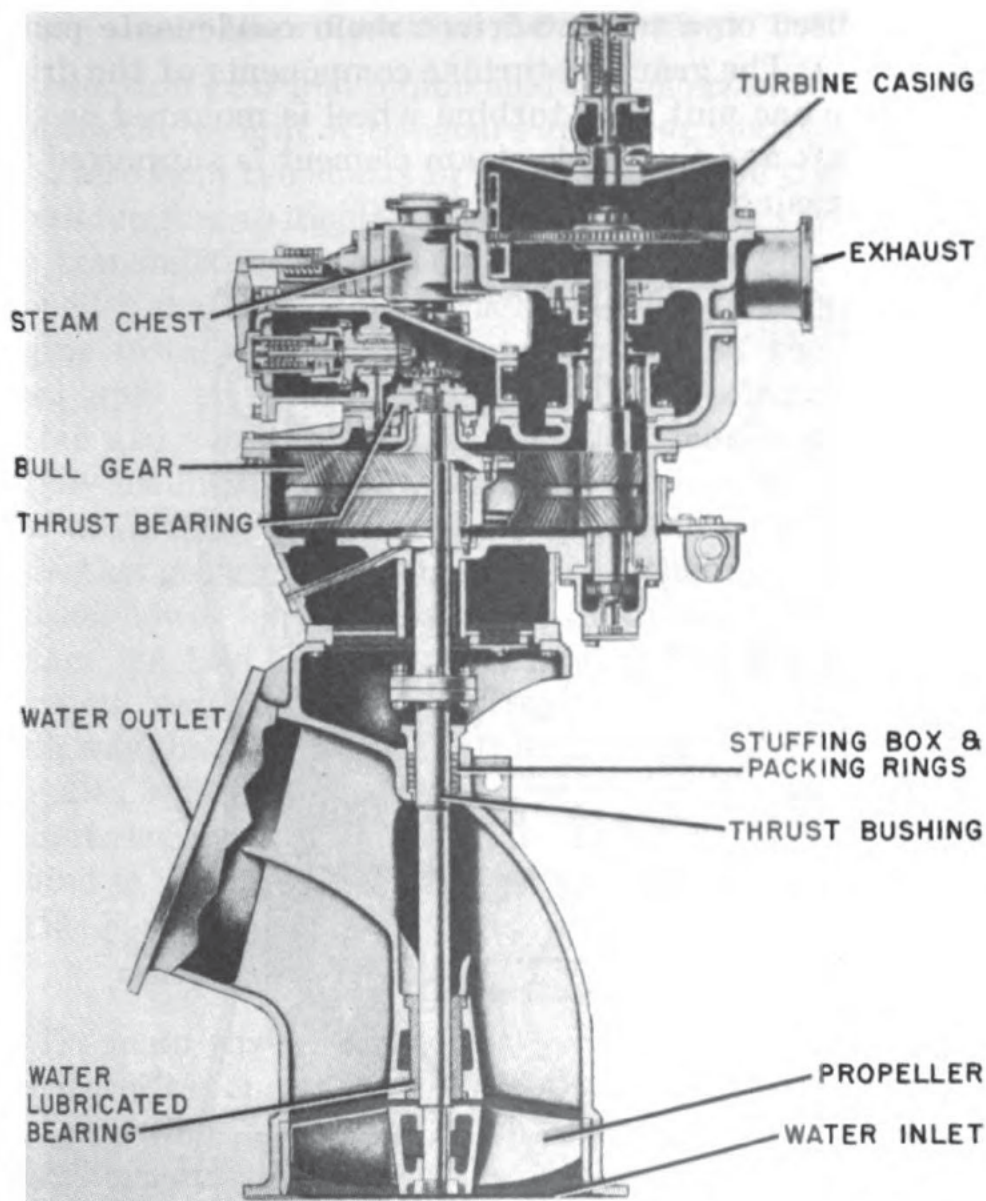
Main condenser circulating pump (showing reduction gearing).
